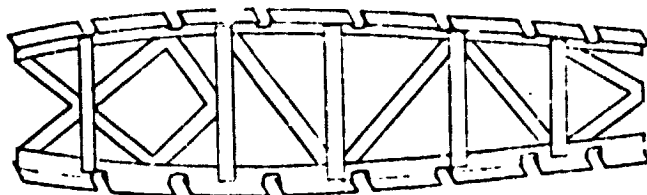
Assumed Arrangement of a Builtup Truss Type of Rib
